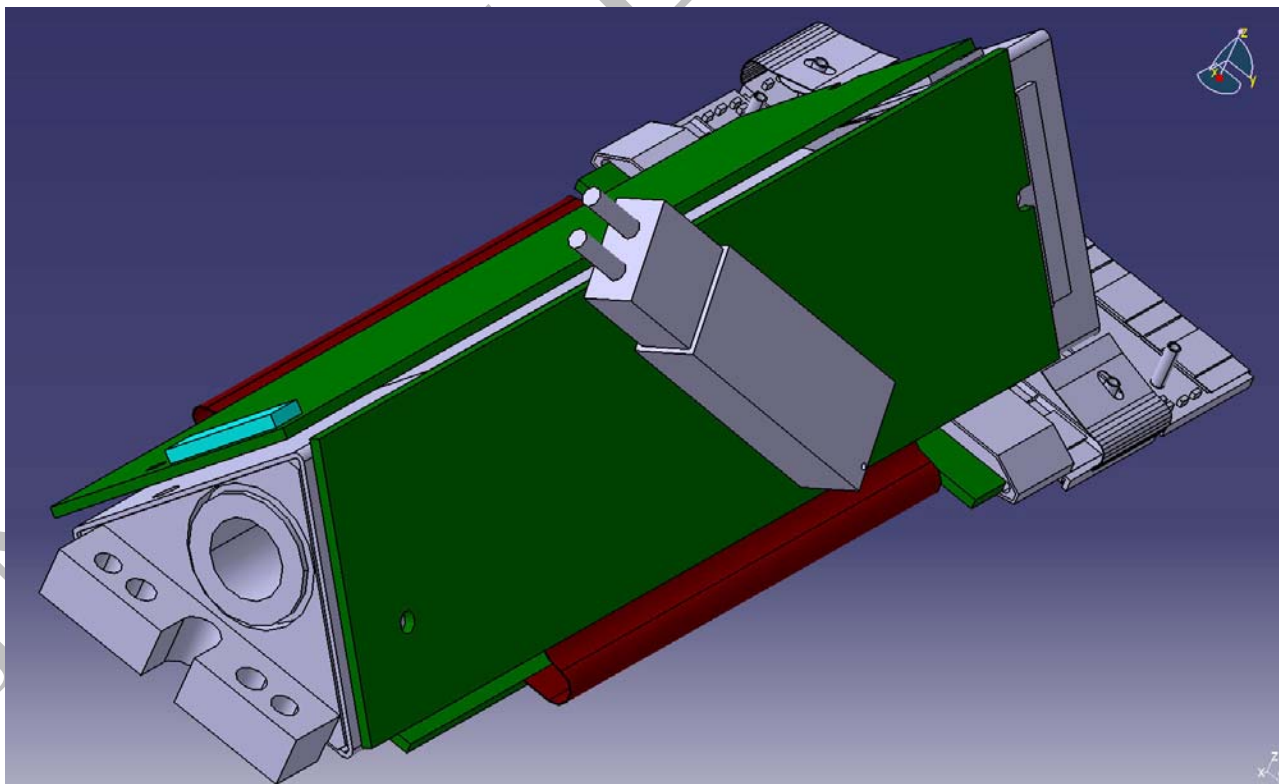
mechanical prototype of ladder card in place on a ladder (CAD drawing by Gérard Guilloux)
